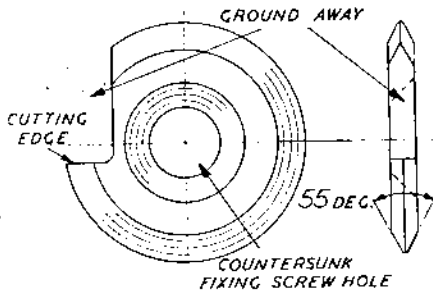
Form of disc cutter recommended for model engineering purposes. (Twice full size.)
